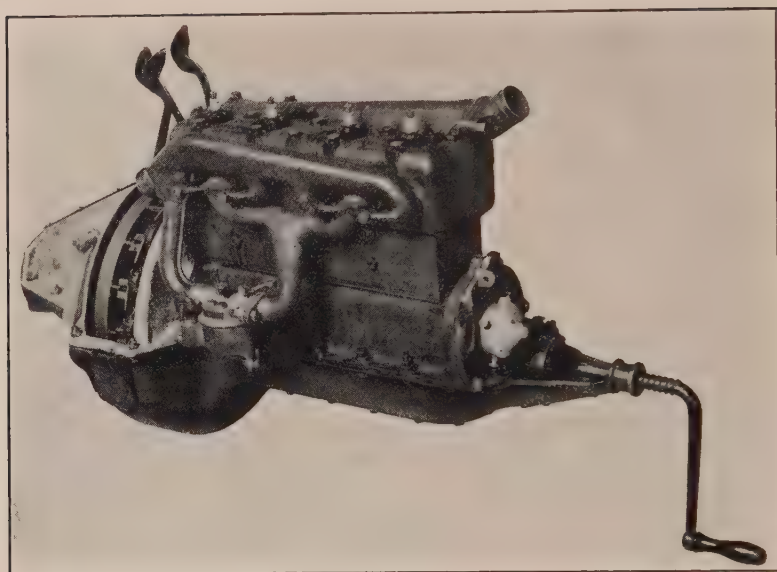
Ford Engine. Cylinders cast en bloc with upper half of crank case. Detachable cylinder head.
